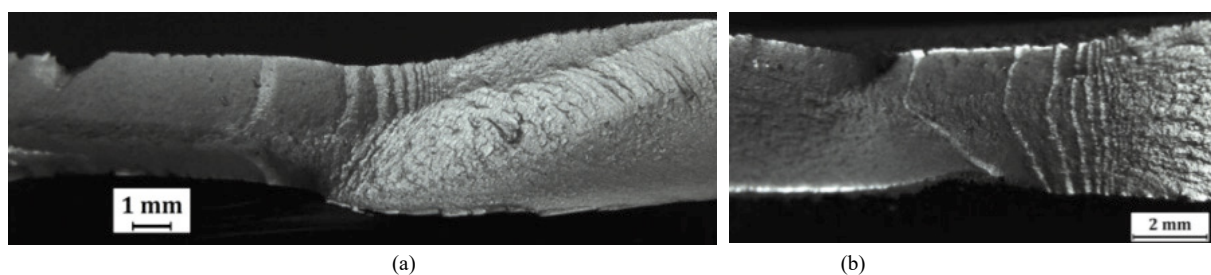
Fatigue fracture surfaces of (a) welded and (b) base material ($\sigma_{\max}=550$ MPa).
